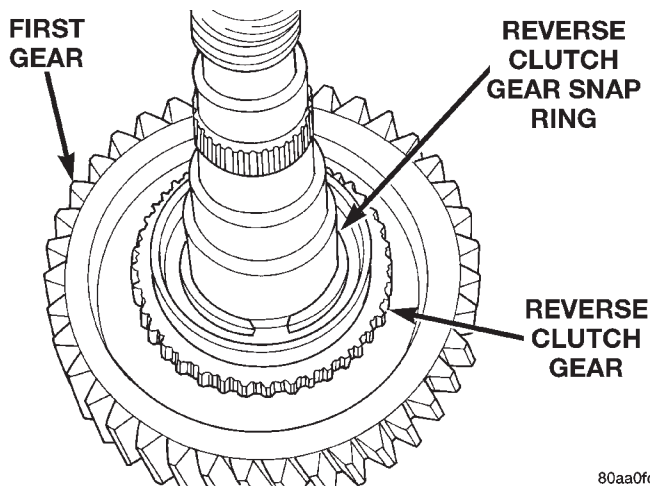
First Gear, Clutch Gear, And Snap Ring Installation
